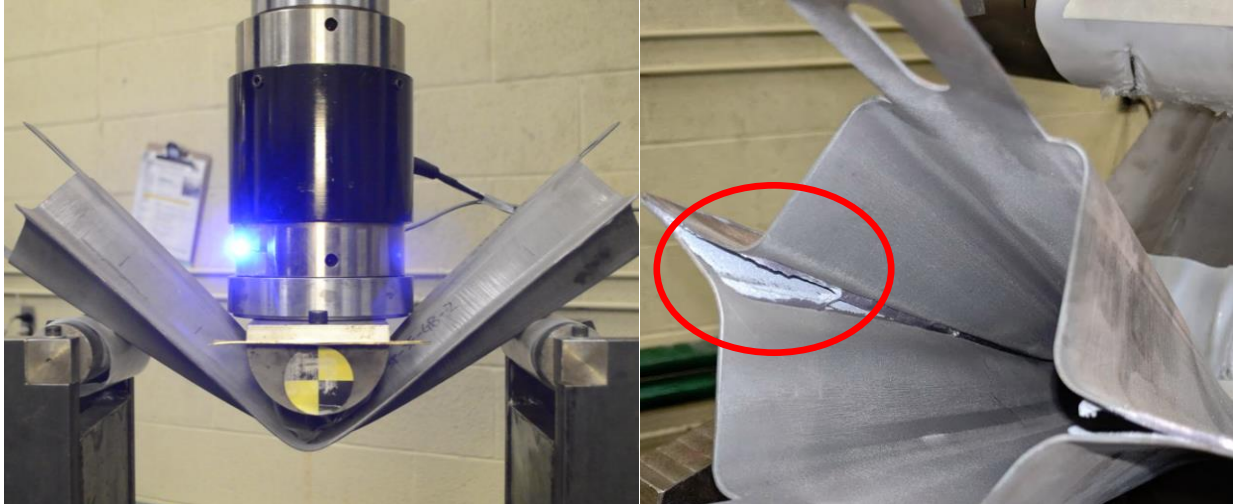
End of indenter stroke during a 1.2 mm QS-3P-SF-GB test, showing that adhesive failure is minimal and only at the inner edges of the flange at the ends of the tube
